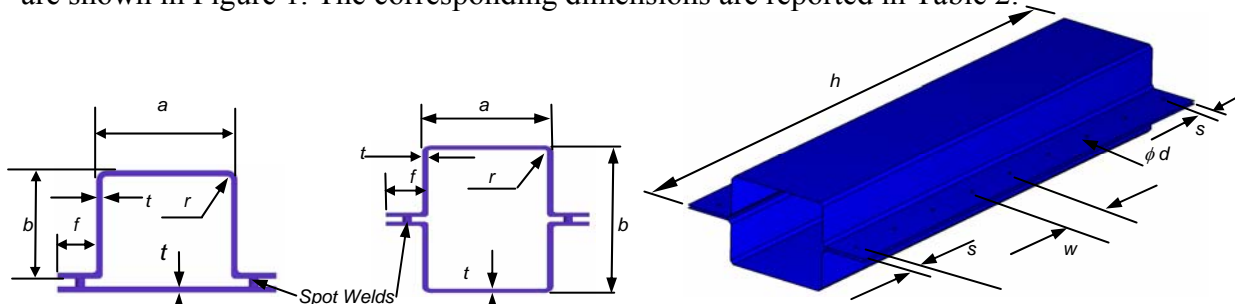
Geometrical configuration of columns and spot-weld characters: cross-section of a single-hat specimen, cross-section of a double-hat specimen, and spot weld arrangement demonstrated in a double-hat specimen.
